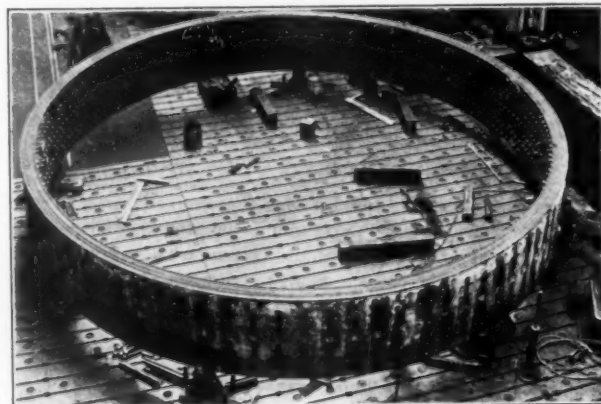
ROTOR RIM READY TO BE PLACED ON SPIDER
